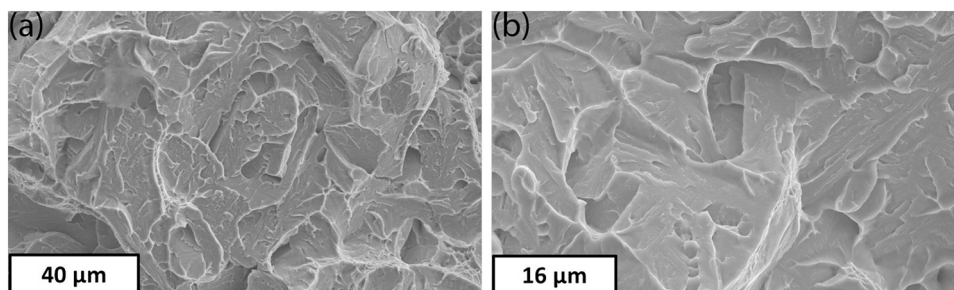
Fracture surface morphologies of the pre-cracked CT specimen tested in air at (a) lower and (b) higher magnification. The crack morphology observed here corresponds to critical cracking.
